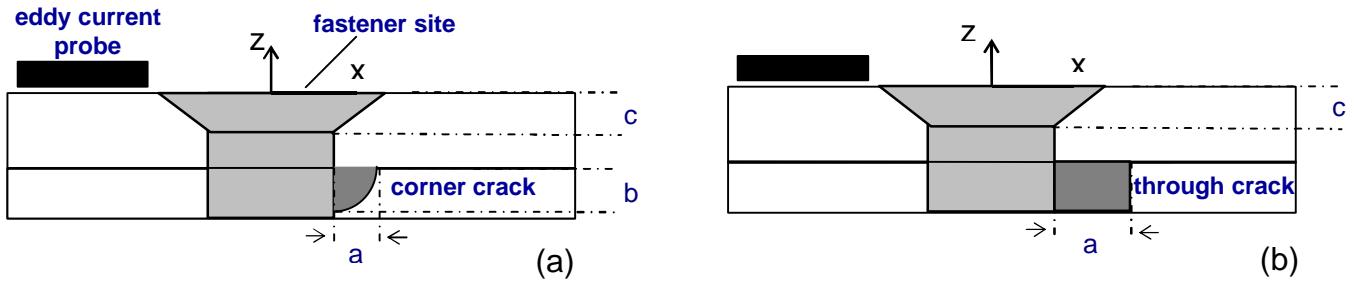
Diagram of fastener site model with (a) a corner crack and (b) a through crack.
